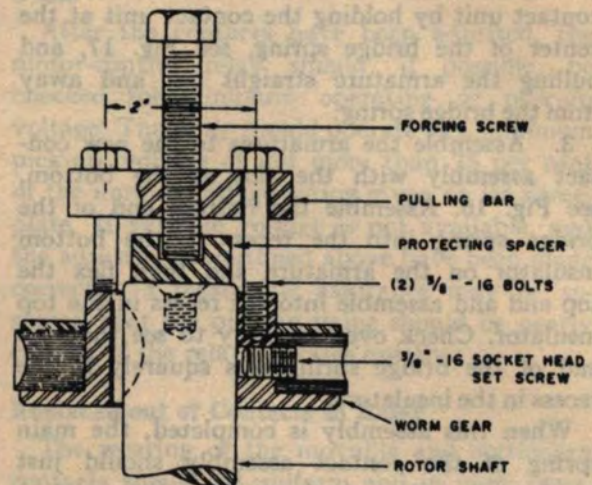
Method used in removing worm gear, typical of small kva-size regulators
